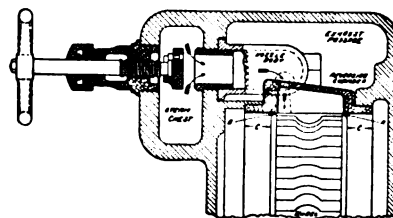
DIAGRAM SHOWING WHEEL CLEARANCES
